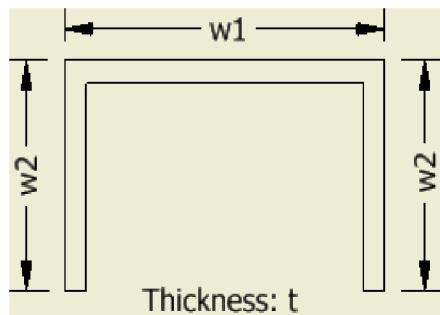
Design variables of closed form “C” type stiffener cross section.
